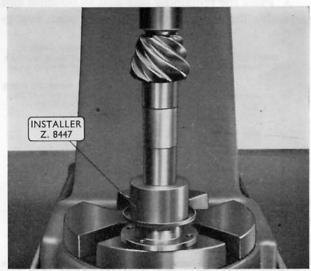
Pressing a new dust shield on the universal joint coupling flange
